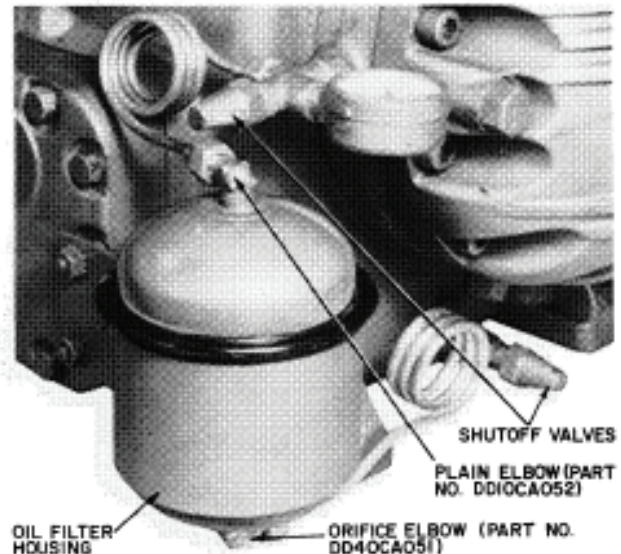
Oil Filter Accessory Package (5H40-5H86)
